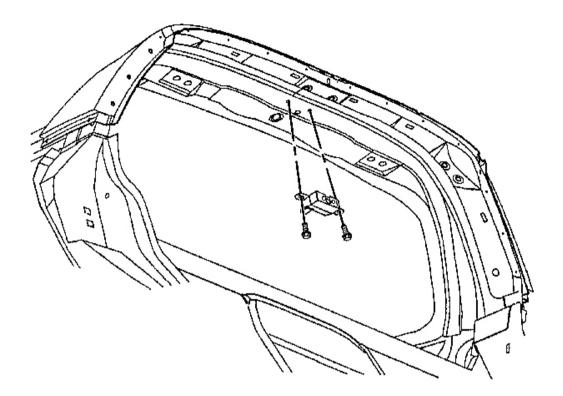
Antenna Buffer To Roof Bow Retaining Screws Courtesy of GENERAL MOTORS CORP.
